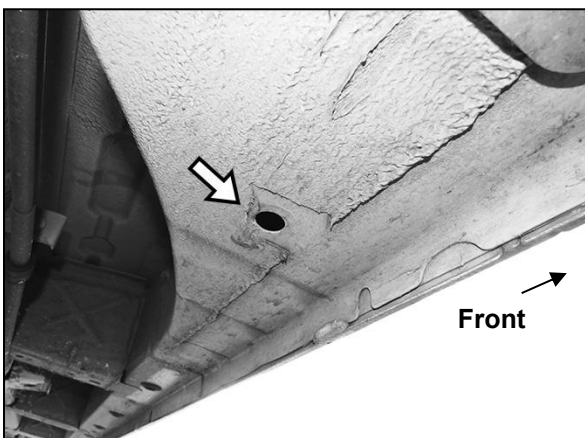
Remove plug or tape to uncover driver/left front mounting location (arrow). Scrape undercoating from mounting surface as necessary
